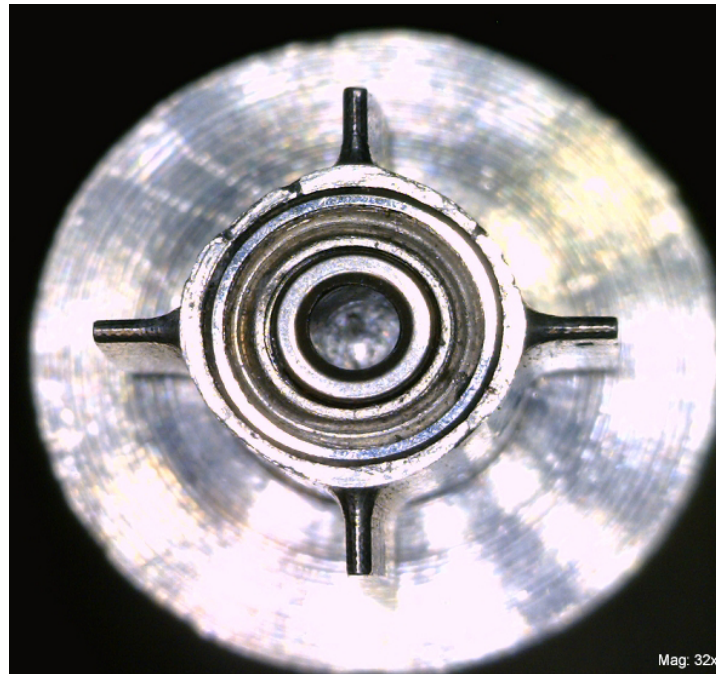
Photograph of bearings placed within inlet guide vane.
